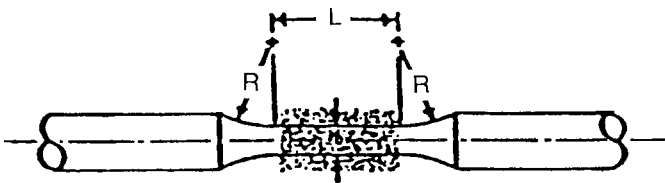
Bending Fatigue Specimen With Tangentially Blending Fillets Between the Test Section and the Ends for Rotating Beam or Axial Loading
